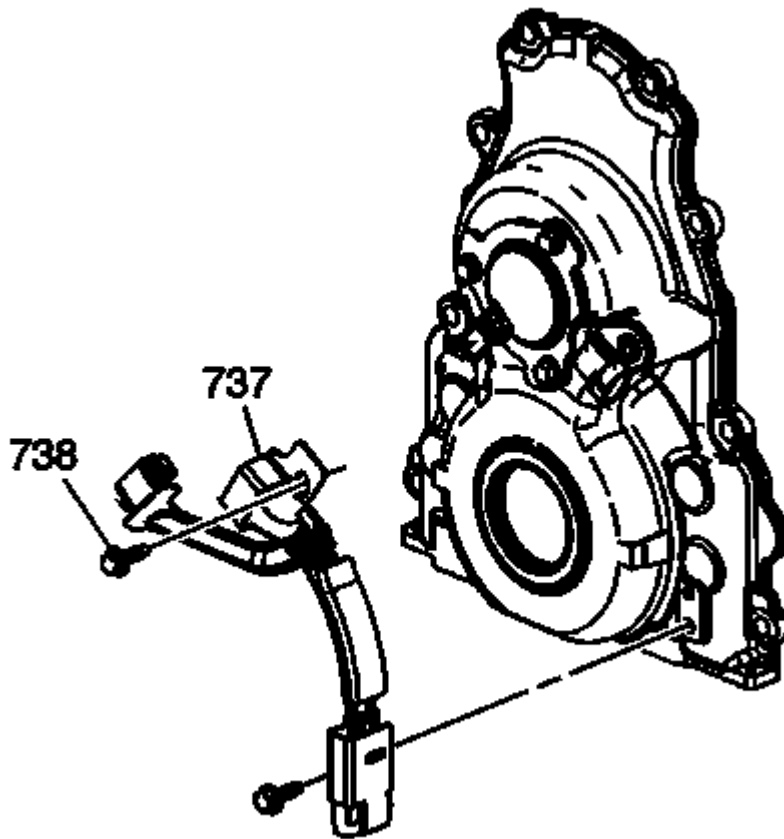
View Of CMP Sensor Wire Harness & Bolts
